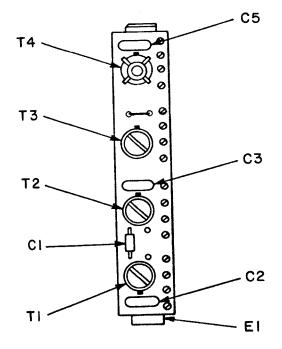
7 MHz Subassembly A2A4A25, Component Locations
